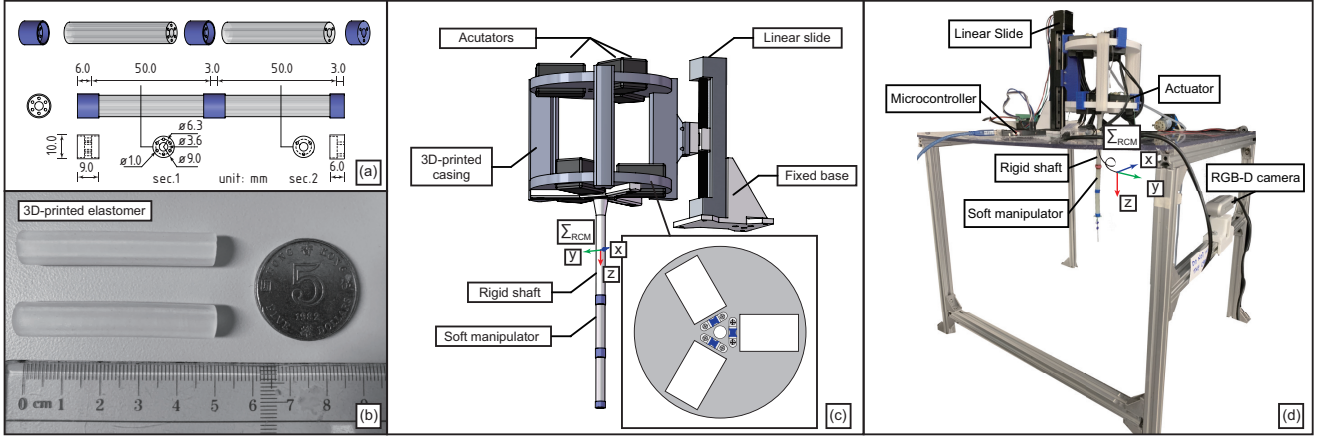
(a) Design layout of the soft manipulator and its assembly. (b) Snapshot of 3D-printed soft segments. (c) Robot assembly. (d) Overall setup.
